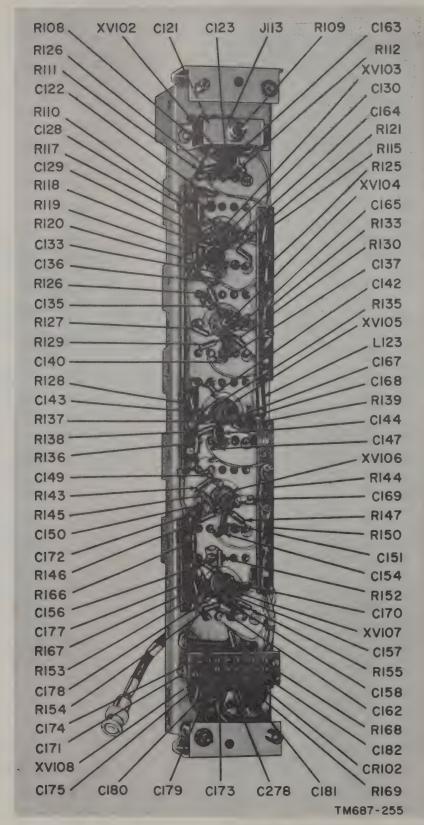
Receiver if. amplifier plug-in assembly, bottom view.
